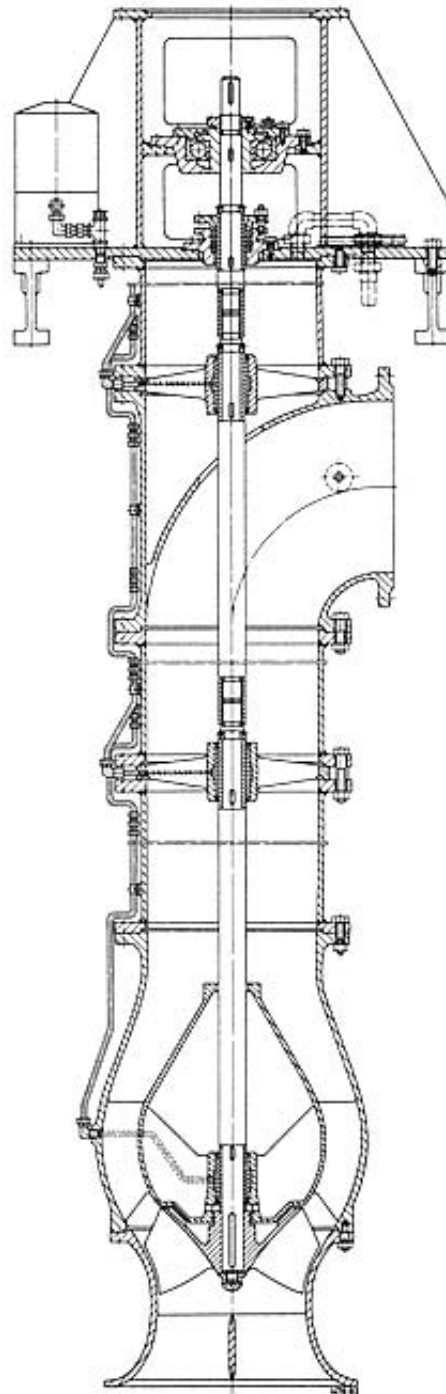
Irrigation pump, tubular casing pump with helical impeller
